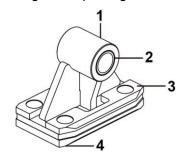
Assembling and replacing the slider 1. Support 2.Sleeve 3. Slider 4. Slider
